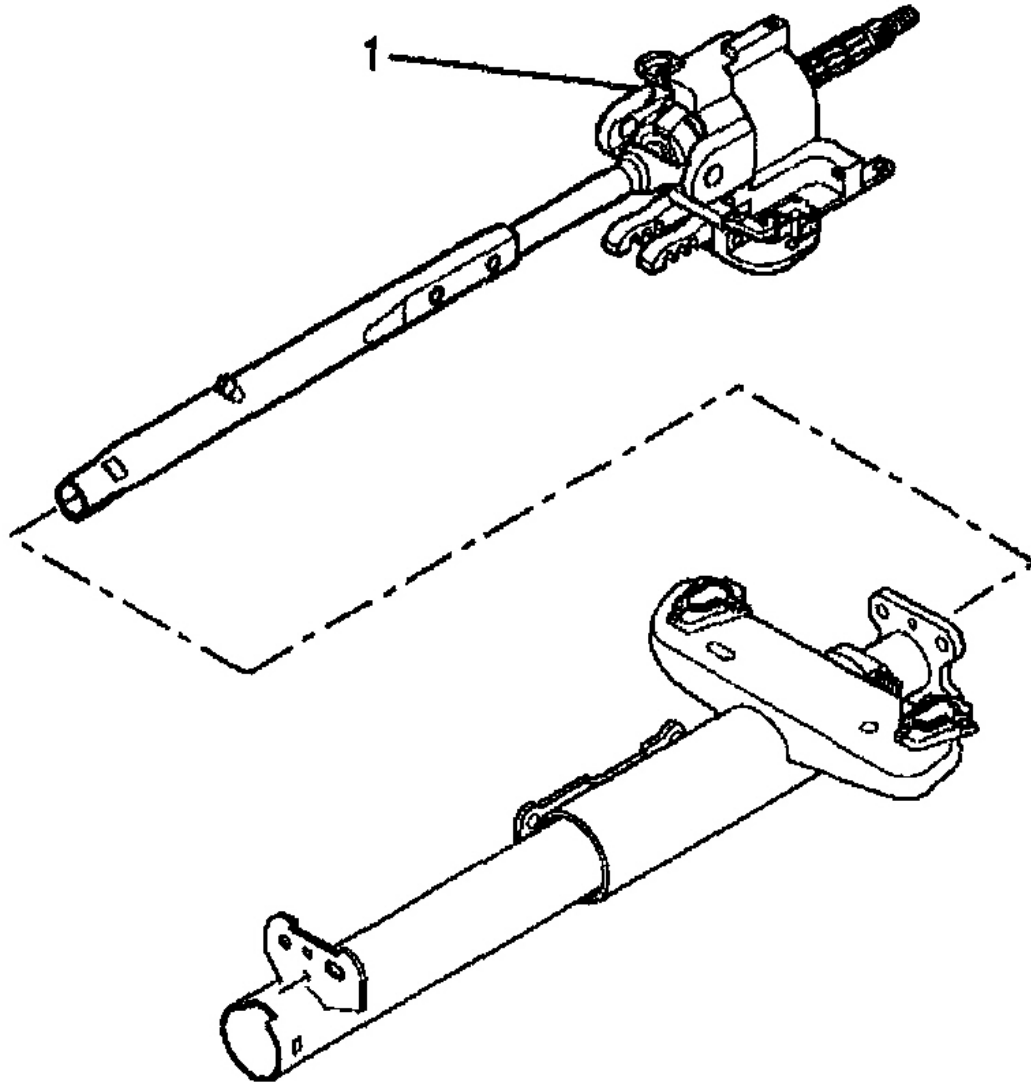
Removing Steering Column Support Assembly Pivot Pins
